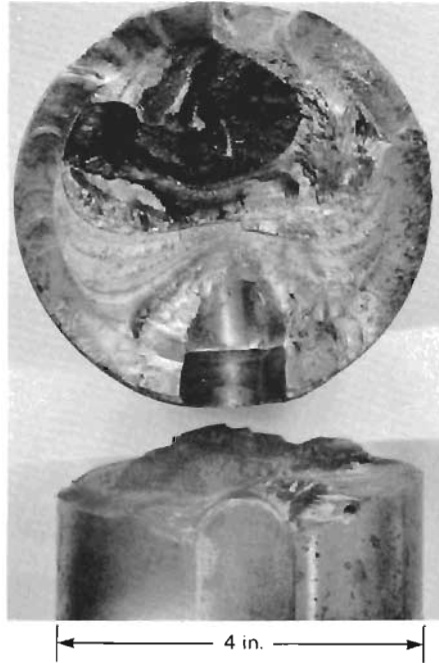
A 4-in.-diameter keyed shaft. Reversed bending; rotational load; high stress concentration; high over-stress.
